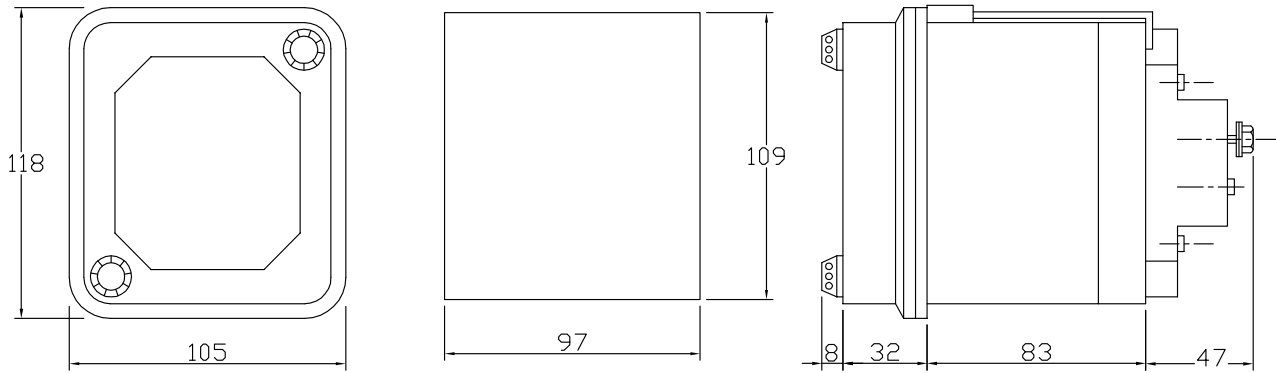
Case and panel cut-out dimensions for case 1/4 N (all dimensions in mm)
